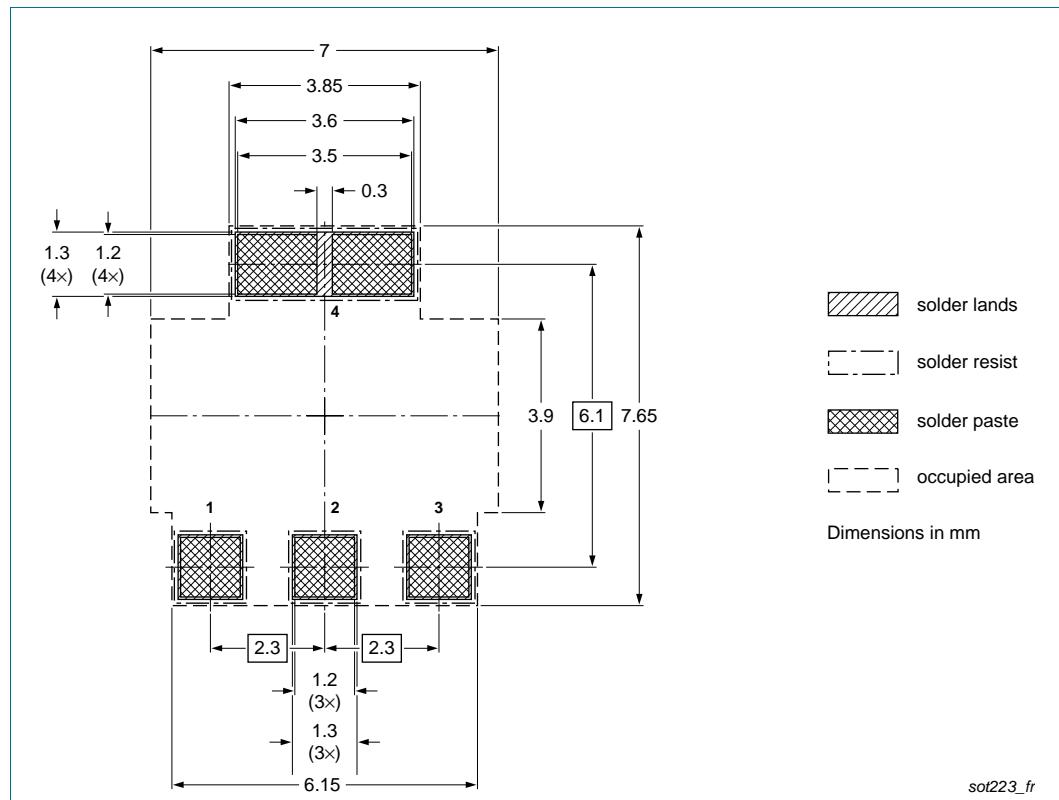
Reflow soldering footprint SOT223 (SC-73)
